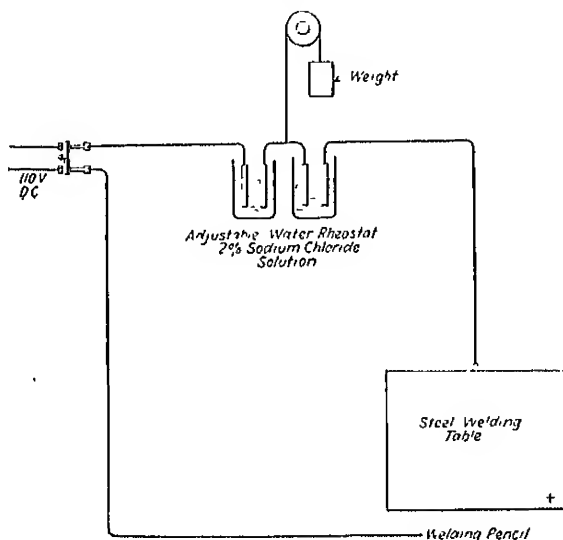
Arrangement of Apparatus for Welding.
